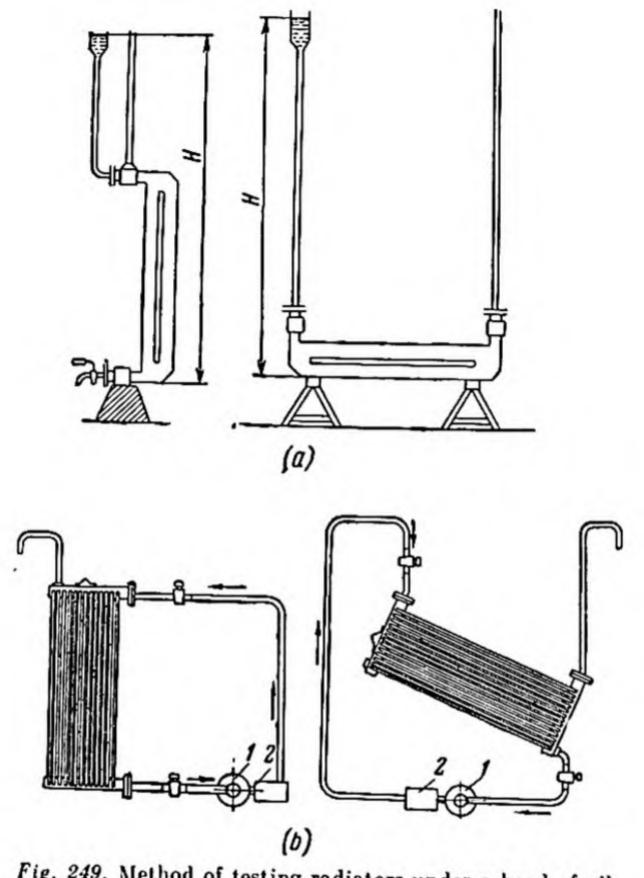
Method of testing radiators under a head of oil (a), and flushing a radiator with oil (b):
